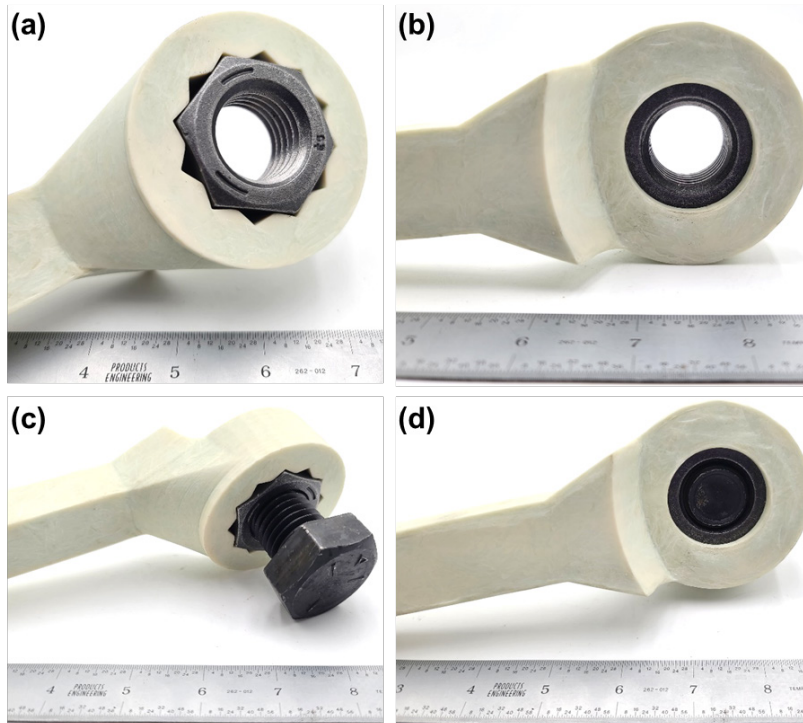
Fit test with a 28.6-mm (1.125-inch) hex nut: (a) hex nut inserted into wrench head, front view, (b) hex nut inserted into wrench head, rear view, (c) hex nut installation onto bolt, front view, and (d) hex nut installation onto bolt, rear view.
